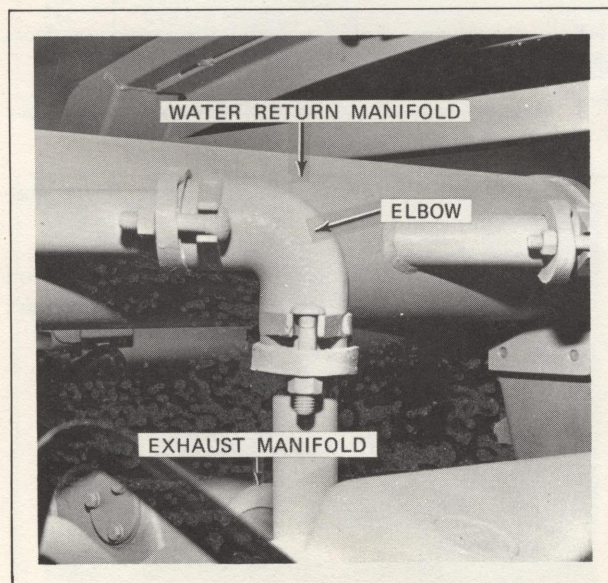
ENGINE COOLING-WATER RETURN MANIFOLD.
